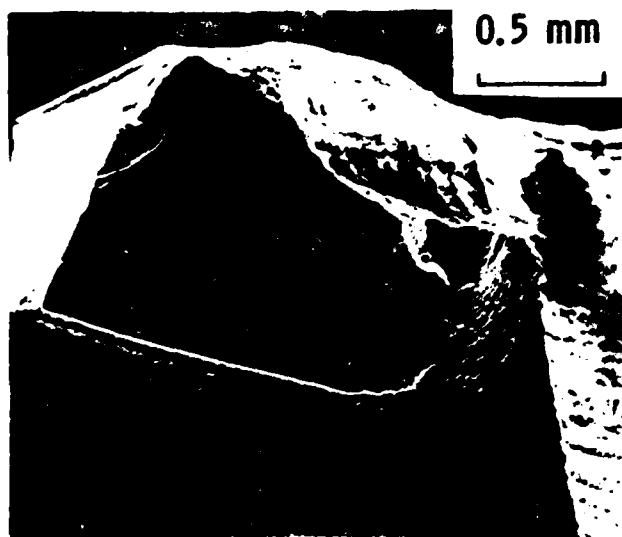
Photomicrographs of matching fracture surfaces near fracture origin "i" in shroud 1-Bf (2).
